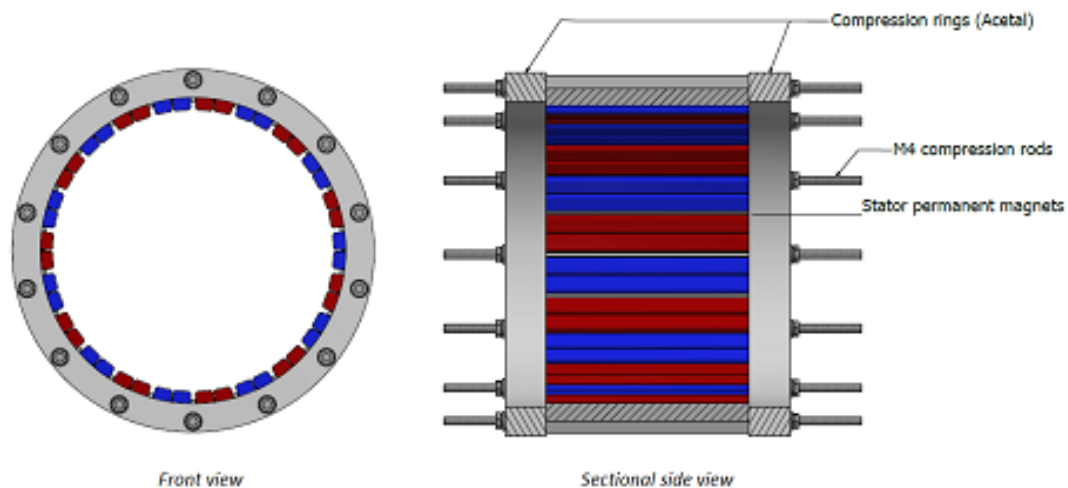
Front view and sectional side view of the PM carrier assembly
